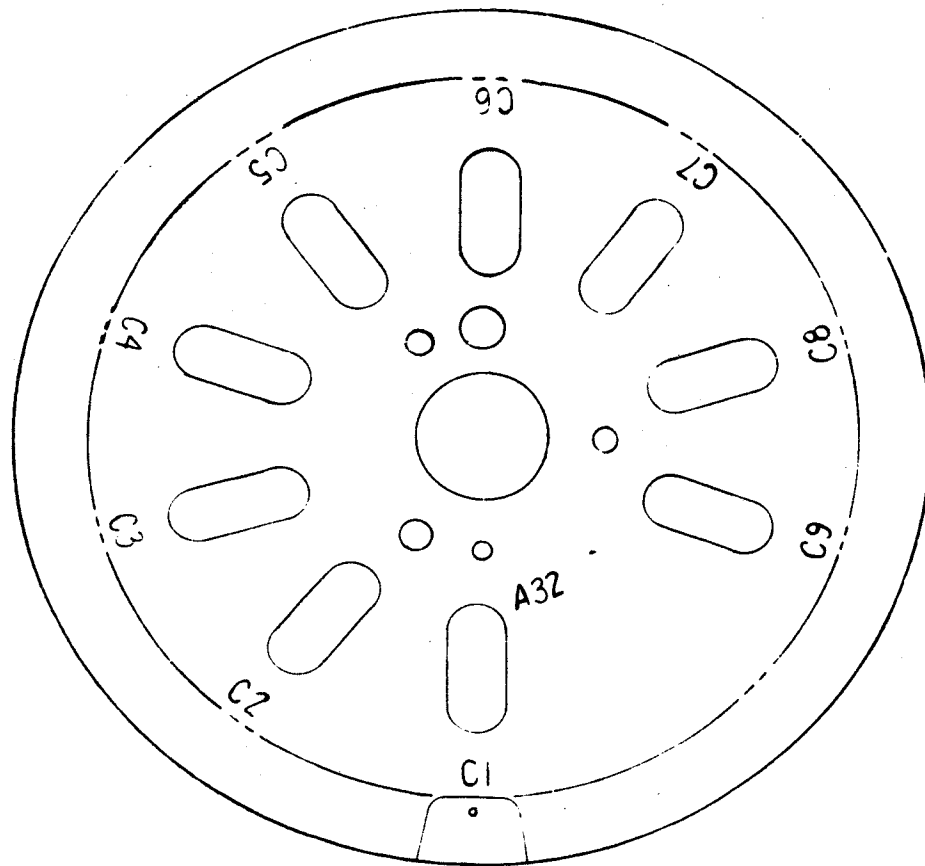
10 kHz Rotor Subassembly A2A4A32, Component Locations
